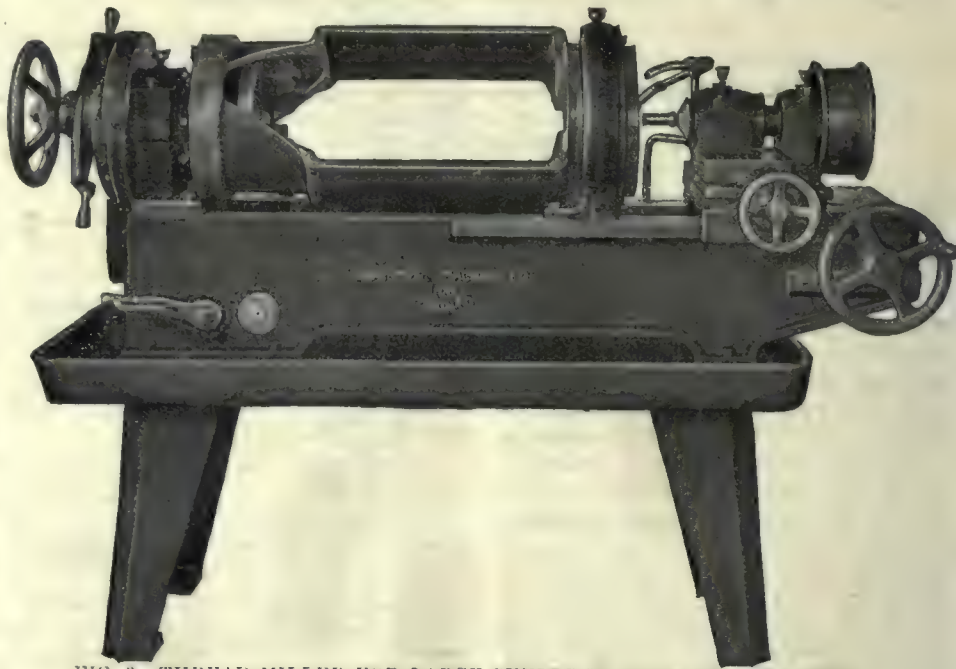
THREAD MILLER FOR LARGE SHELLS UP TO 9.2 IN. DIAMETER.
